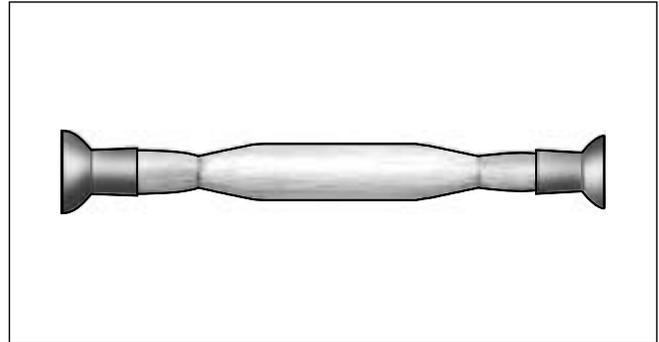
Valve Lapping Tool (Part No. HD-96550-36A)
